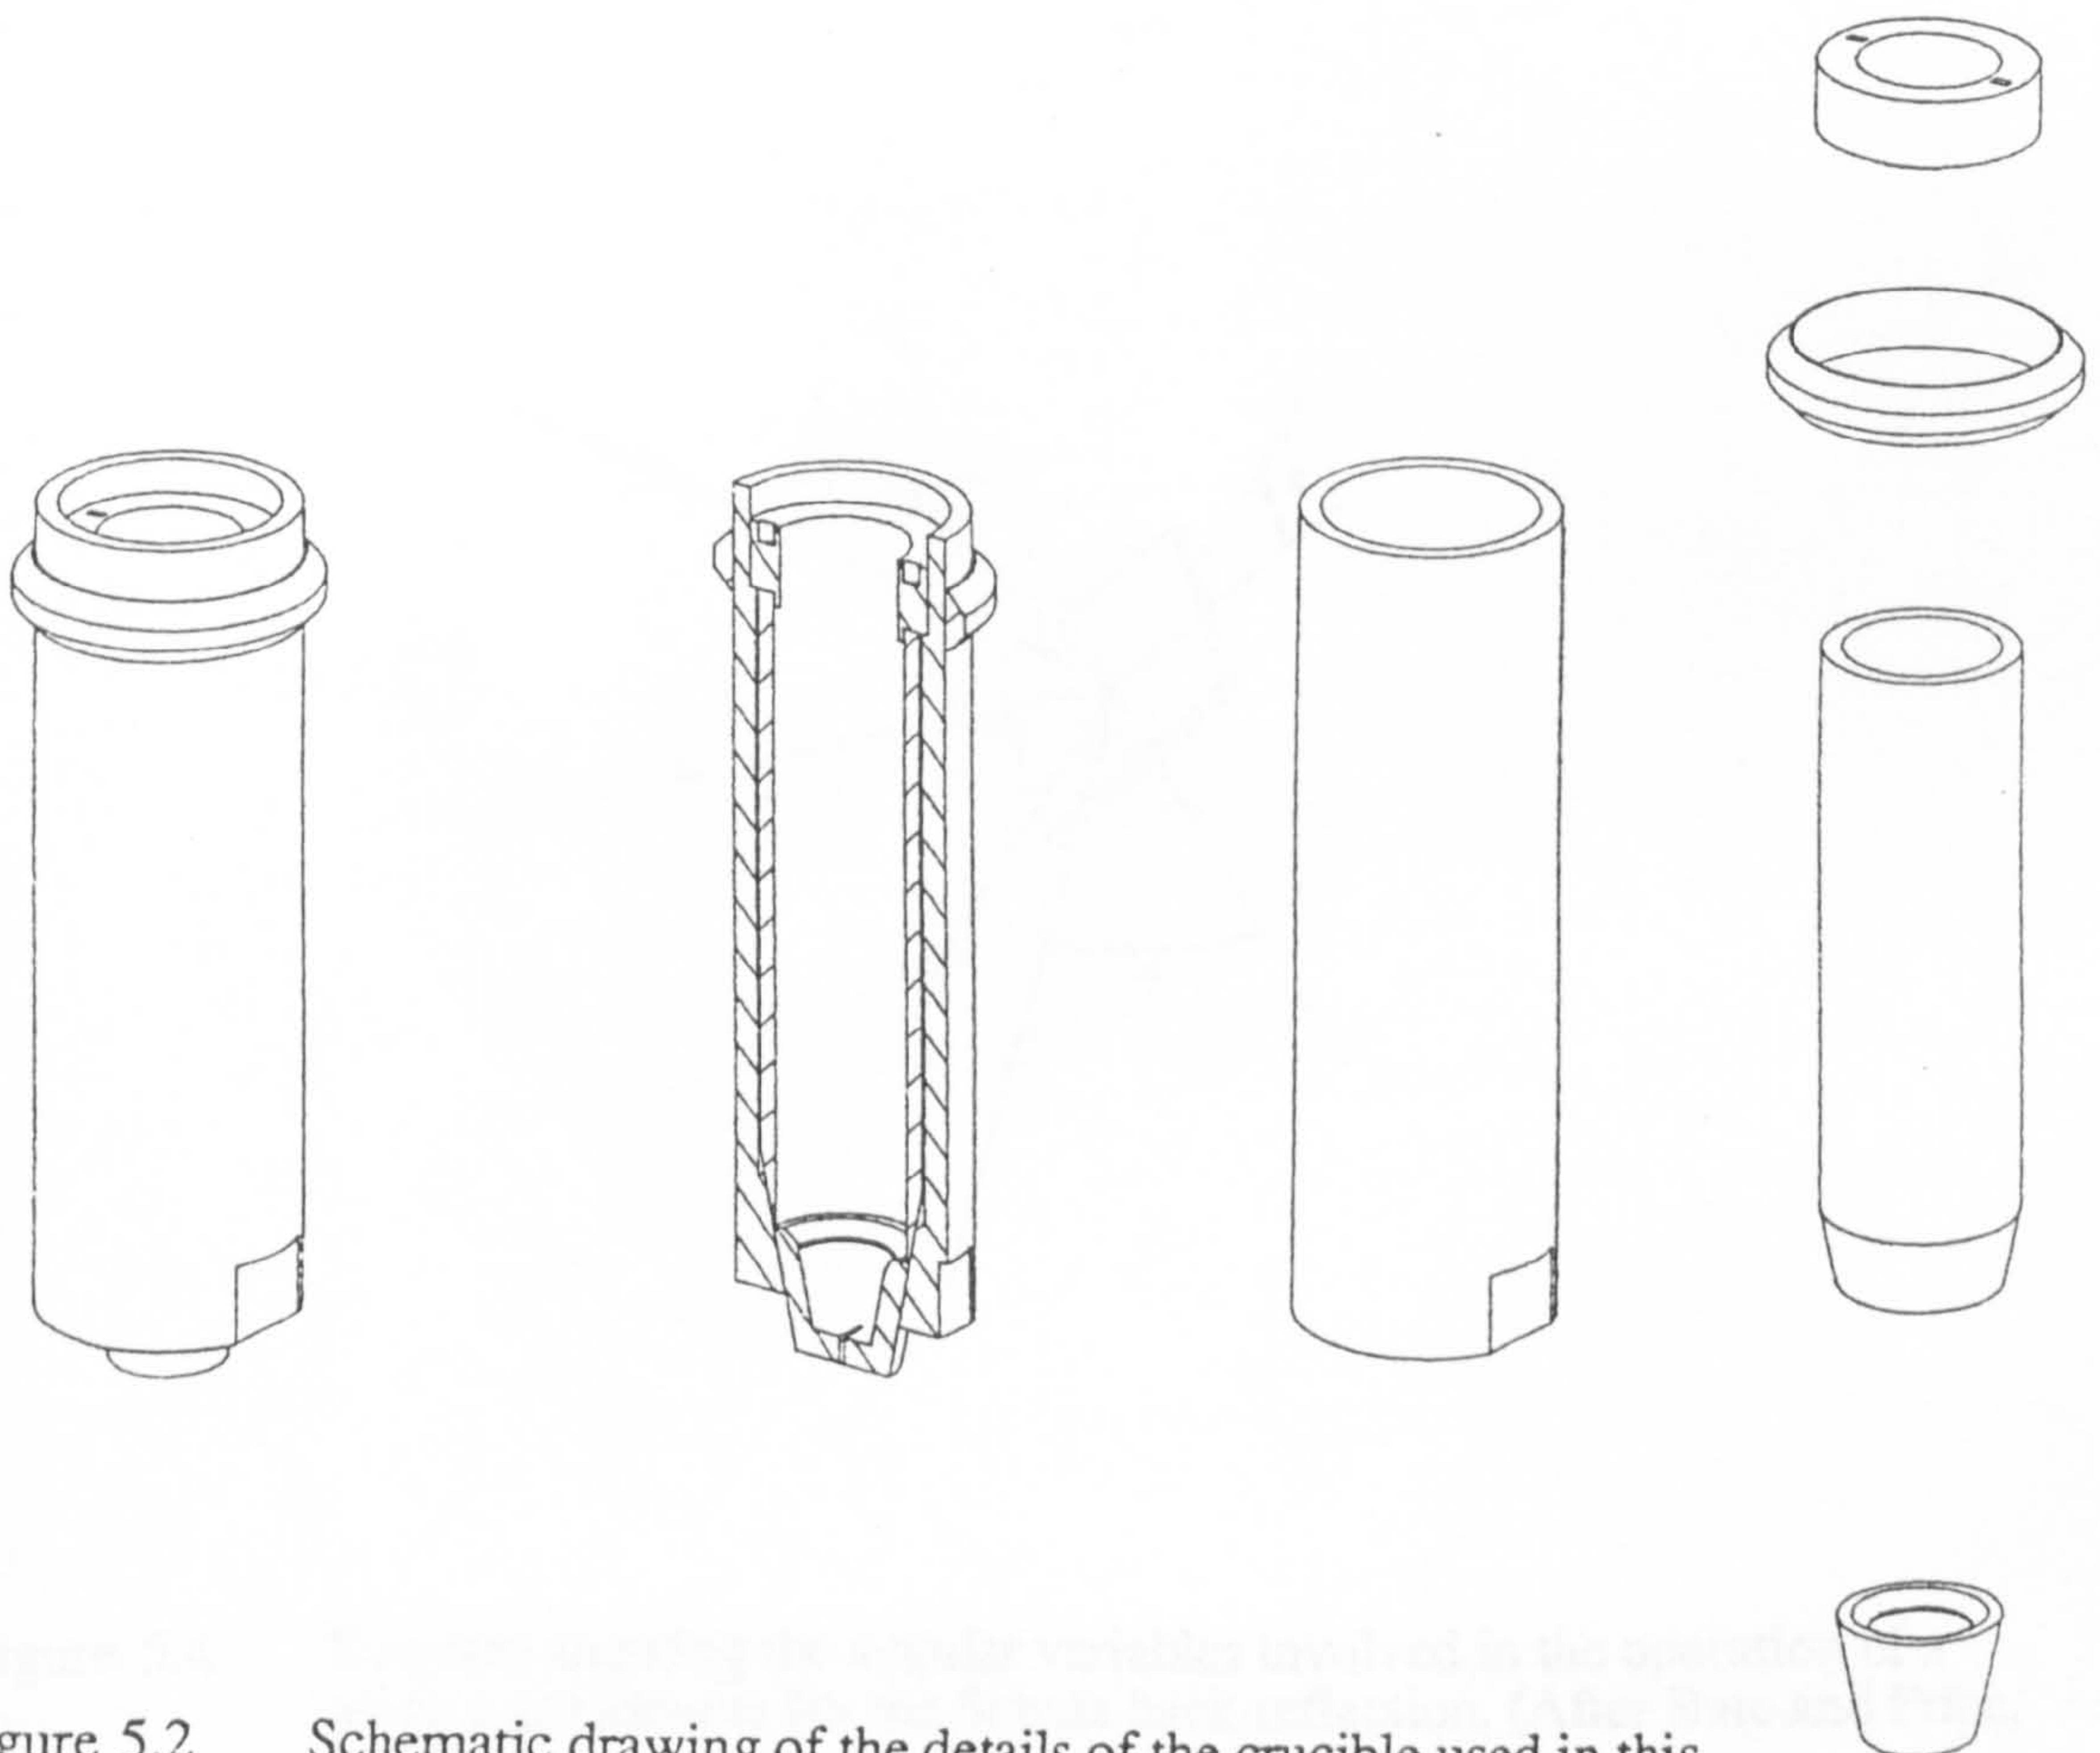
Schematic drawing of the details of the crucible used in this investigation.
